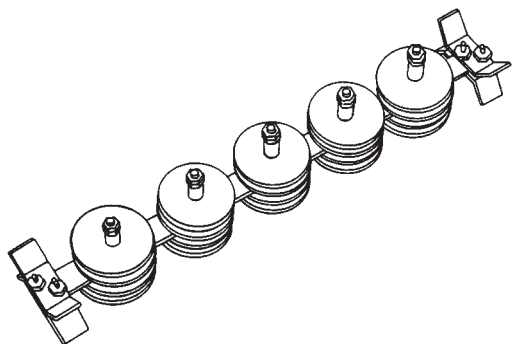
Spool-type specimen holder for use in 3-in-diameter or larger pipe. (Mantell, ed., Engineering Materials Handbook, McGraw-Hill, New York, 1958.)
